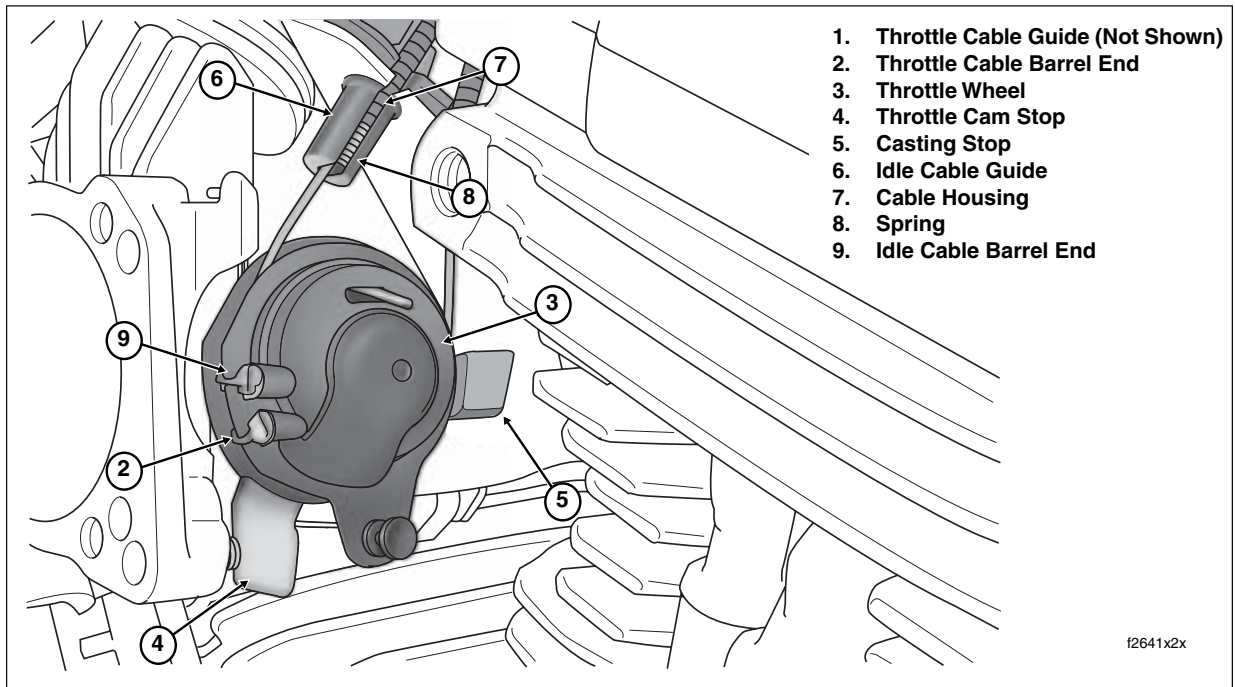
Throttle Cable Assembly - Induction Module Side
